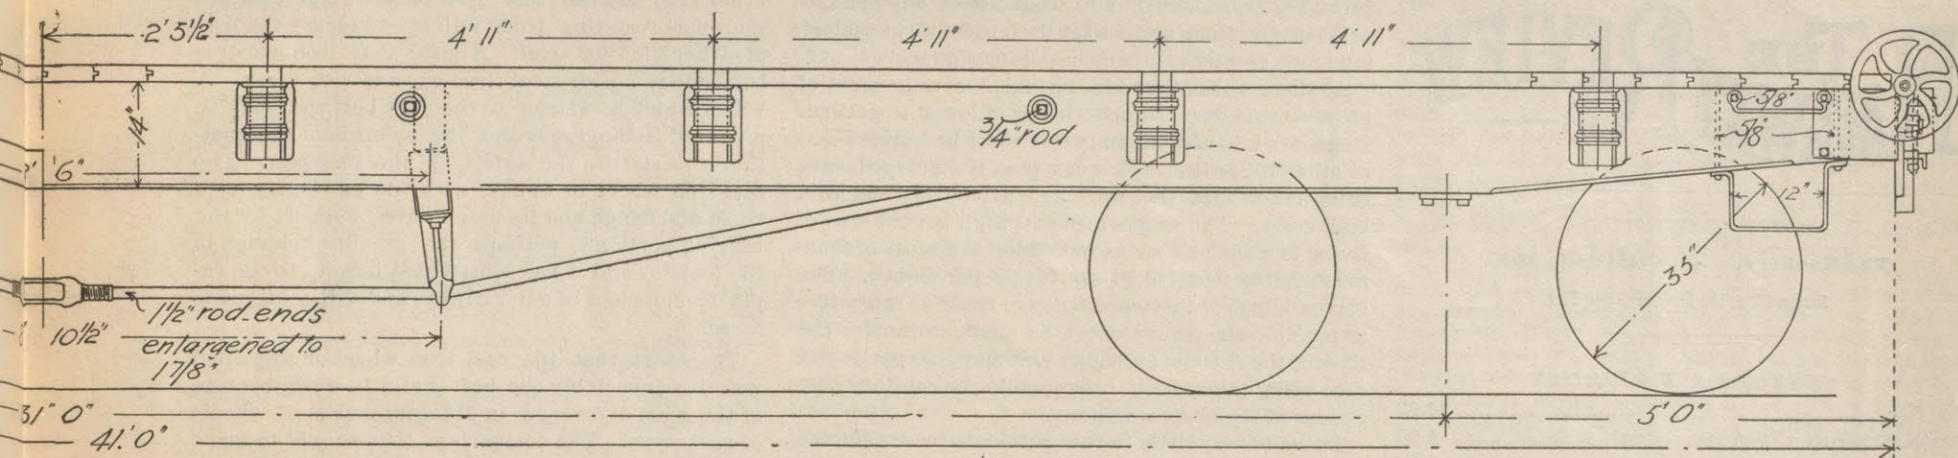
PLAN AND SIDE ELEVATION OF TRUCK.
